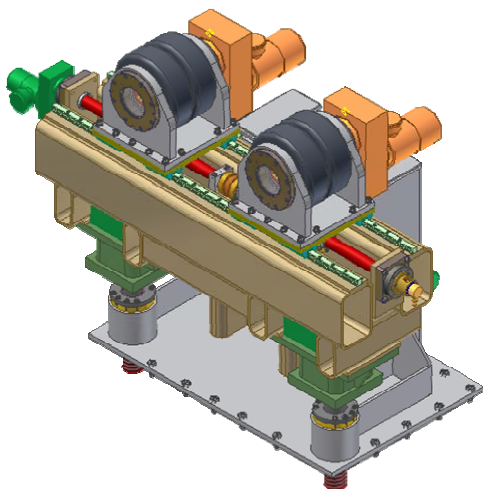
Double Rollers of the Lifting/Lowering and Rotating in Start Welding Position.
